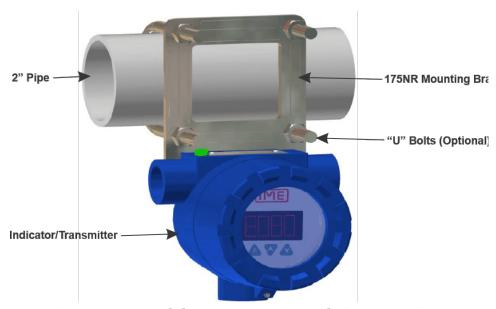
Model 175NR - Horizontal Pipe Mounting
